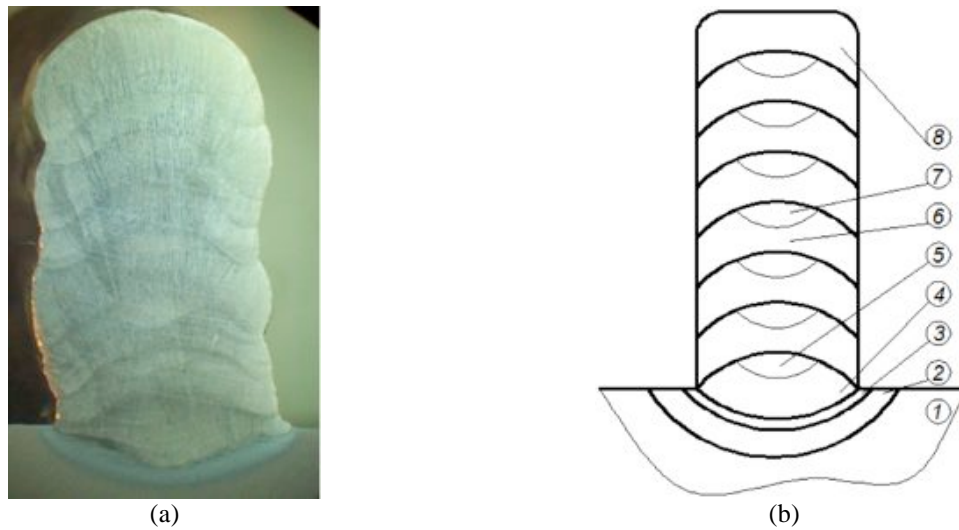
(a) Picture showing the macrostructure of the sample. (b) Scheme of the sample showing the divisions of the weld beads.
